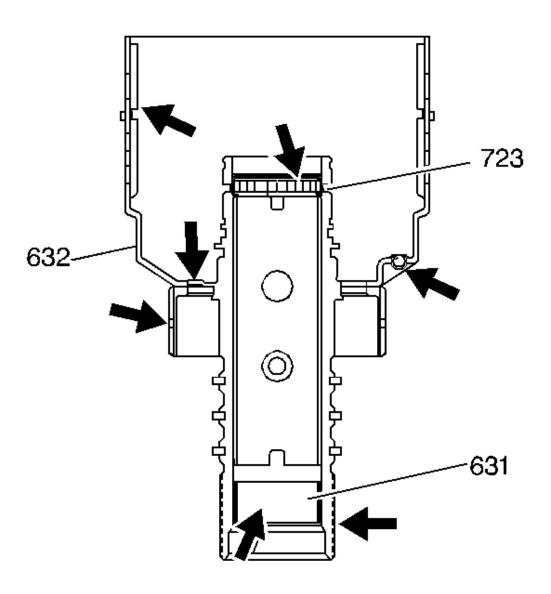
Cross Sectional View Of Inspection Areas In Input Clutch Housing Courtesy of GENERAL MOTORS CORP.
